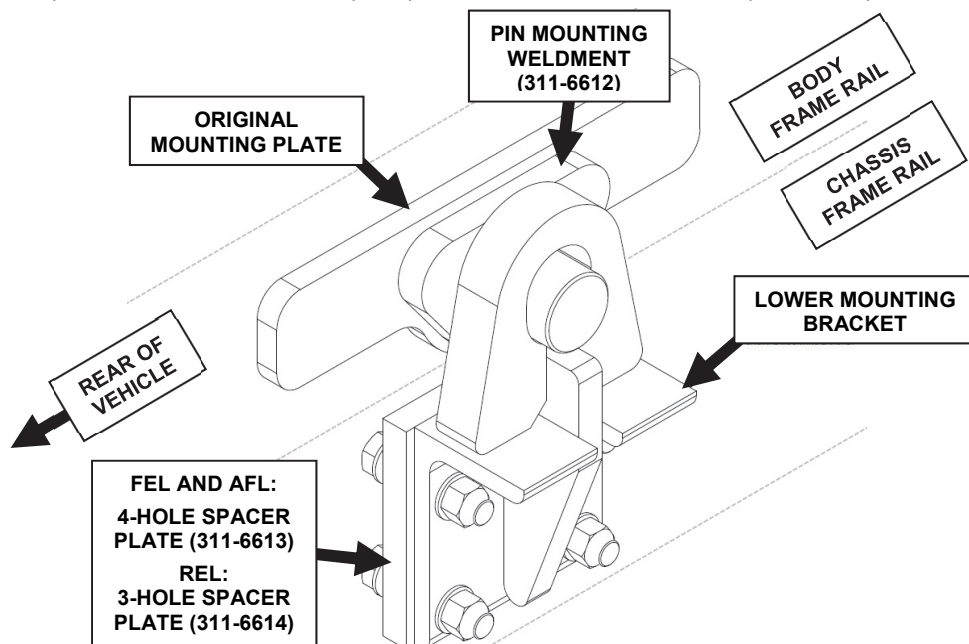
Rear Mounting Pin Weldment Repair Installations (372-8847 and 372-8848)
